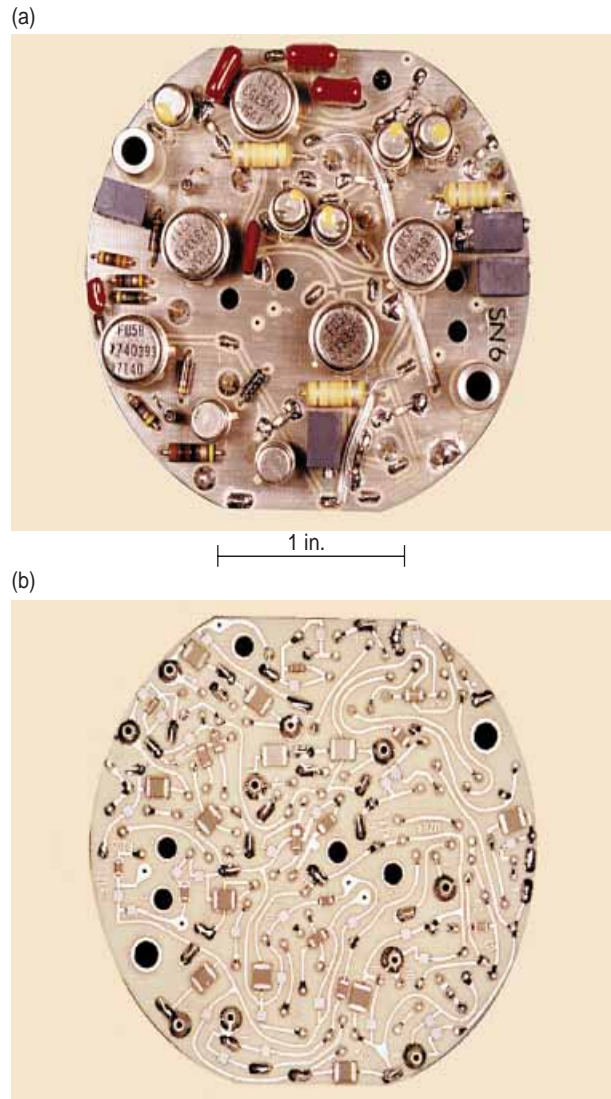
Missile board (early 1970s) illustrating (a) through-hole techniques on the top side and (b) SMT on the bottom side.
